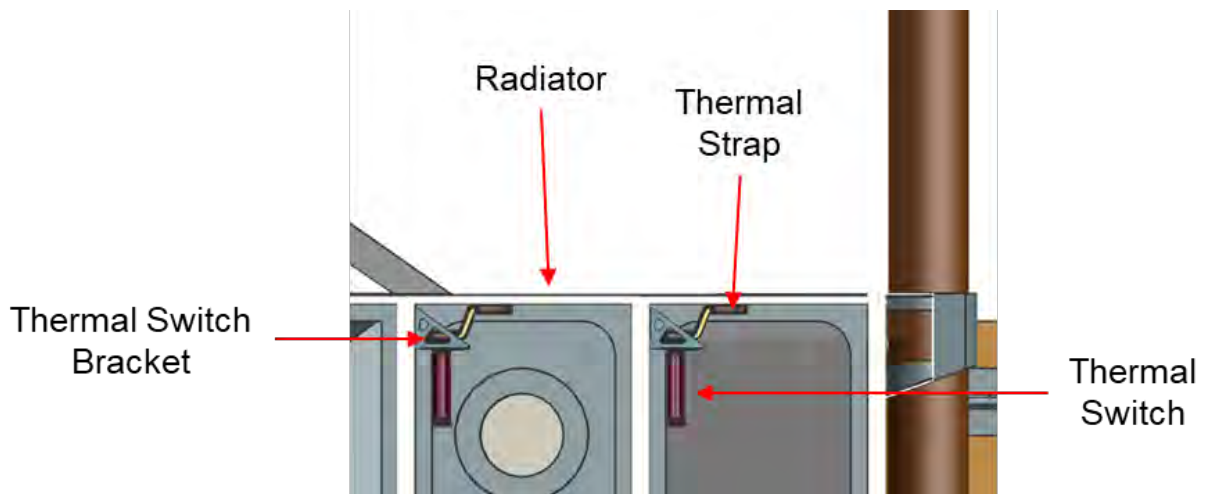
Cross-sectional, close-up, view of thermal system with radiator.
